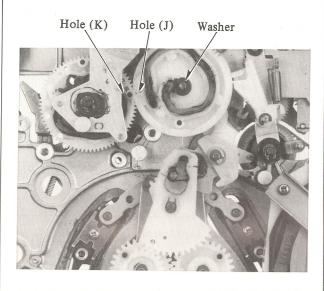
Assembly and Adjustment of Gears and Rods-(8)
